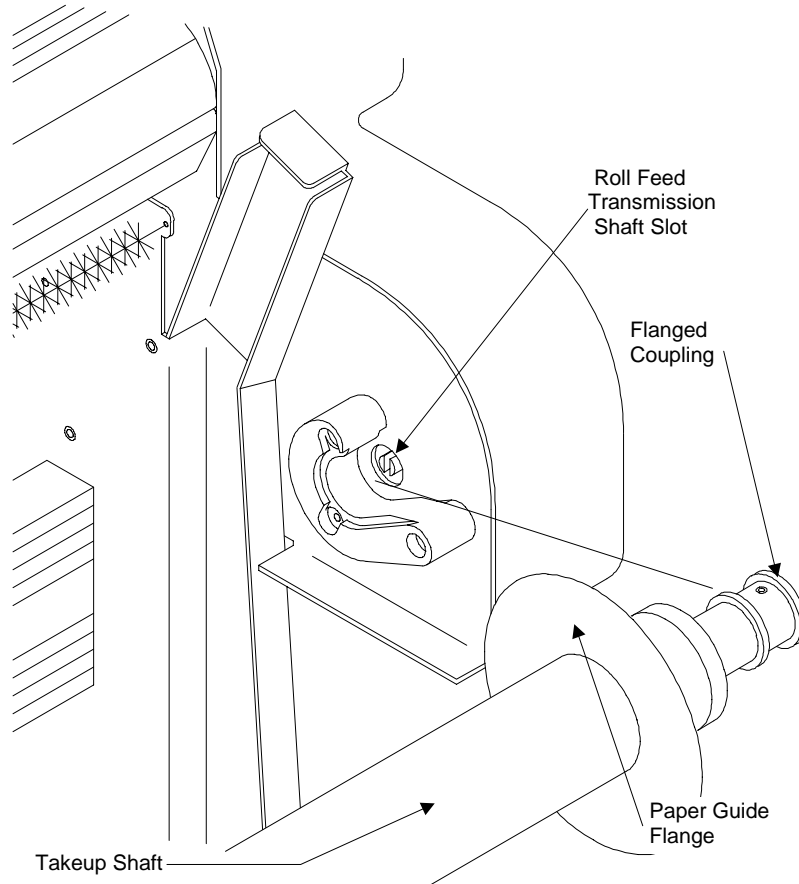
Aligning the Shaft Slot and the Engagement Pin
